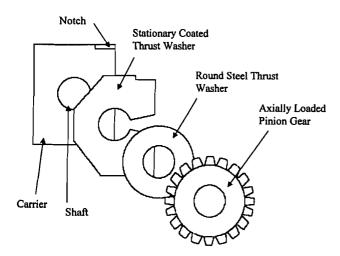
Schematic of main components of the tested thrust washer bearing.
